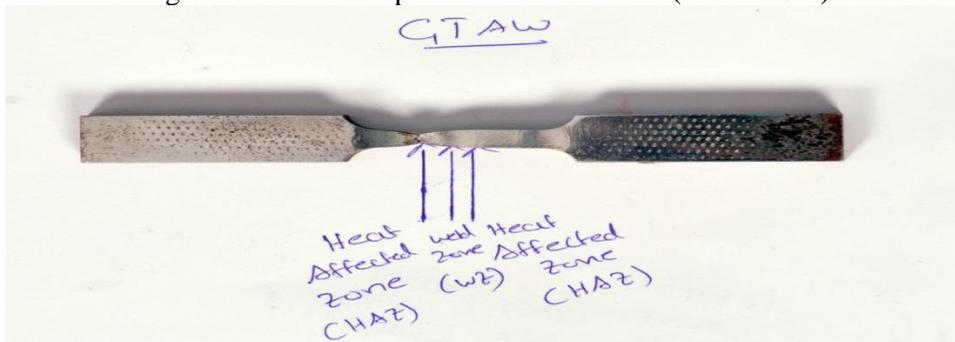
Failed tensile specimen of DMR 249A GTA weld
